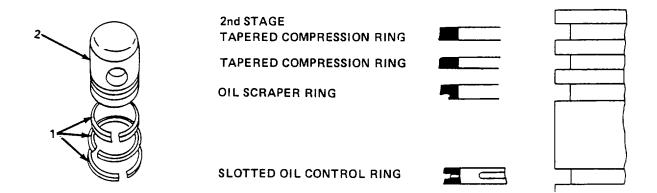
2nd Stage Cylinder and Piston, Repair.
